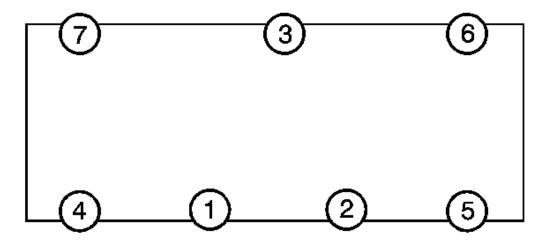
View Of Valve Rocker Arm Cover Bolts Tightening Sequence Courtesy of GENERAL MOTORS CORP.
